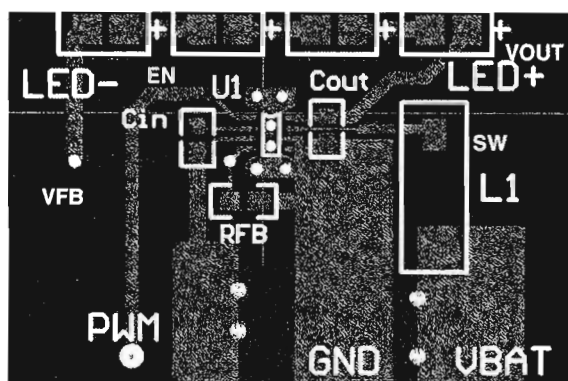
BD6063HFN Frontal surface (TOP VIEW)
